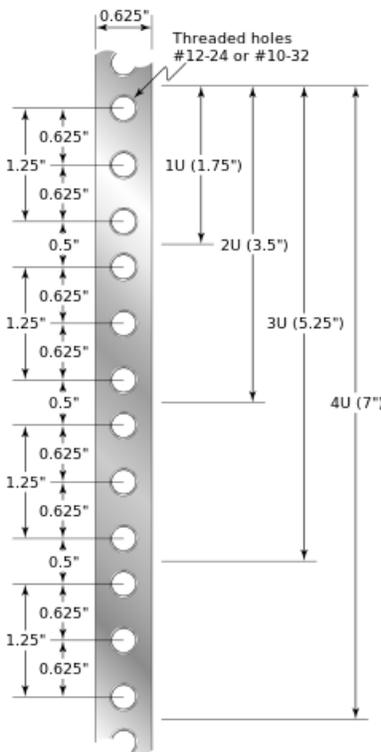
Mounting hole spacing on a universal rack. *Diagram by Sakurambo
